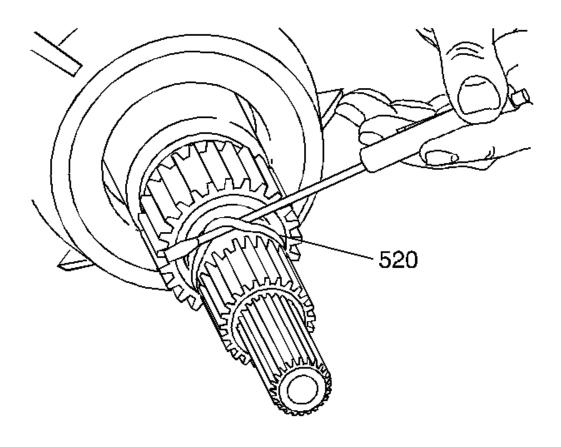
Identifying Turbine Shaft O-Ring Seal Courtesy of GENERAL MOTORS COMPANY
